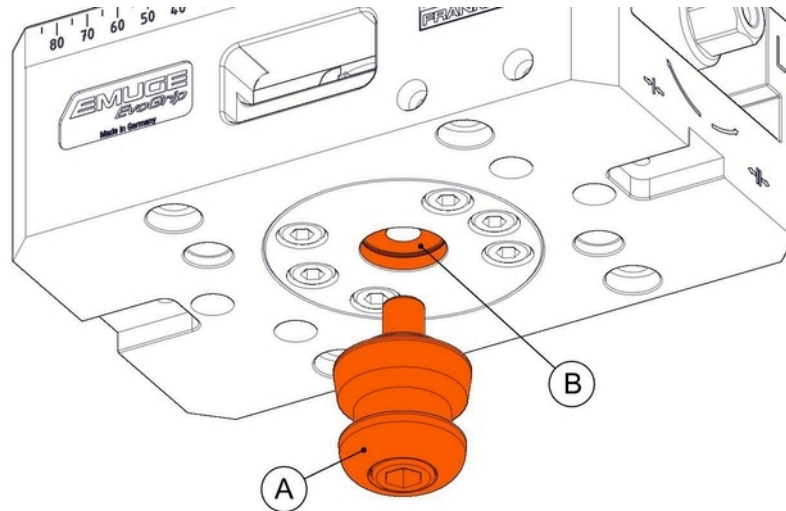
Schematic illustration: Assembly / disassembly of the clamping bolt for compatible zero-point systems
